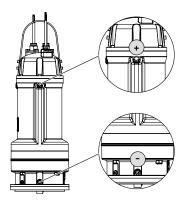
Cooling system: Check the FKT 27.1/27.2 coolant
